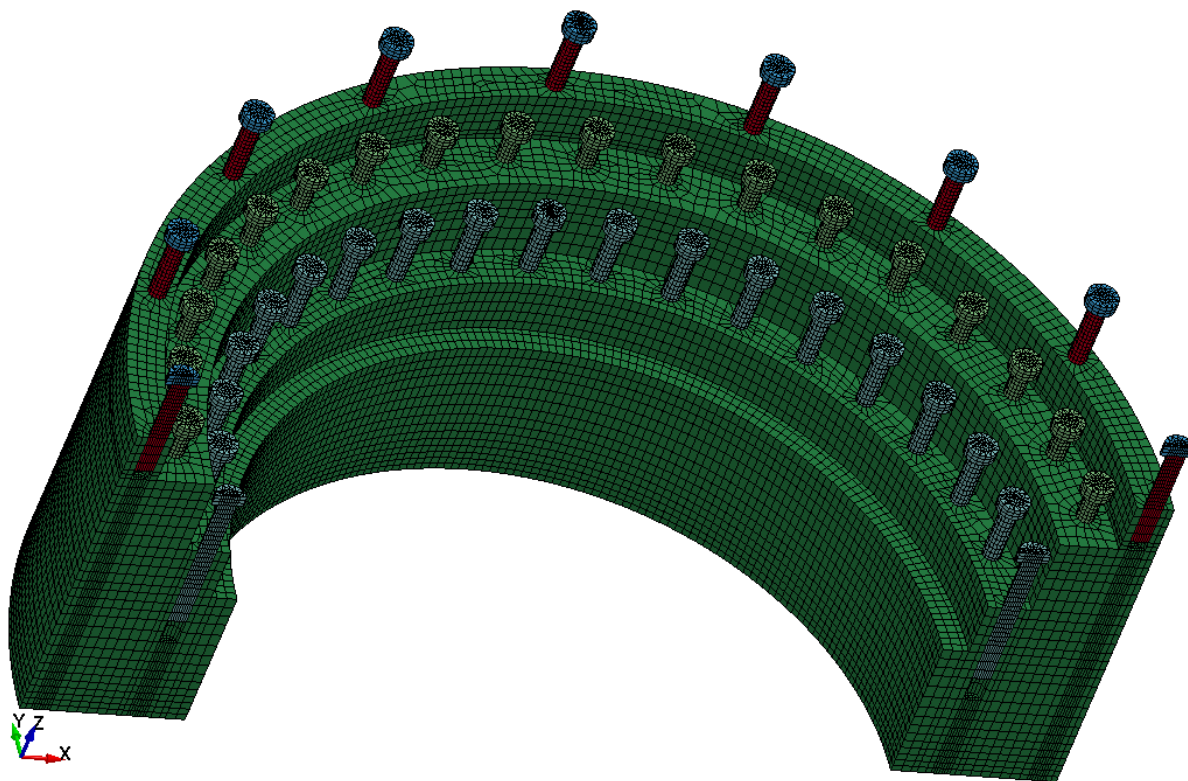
Finite Element Grid for HI-STAR 80 Top Forging and Bolts
